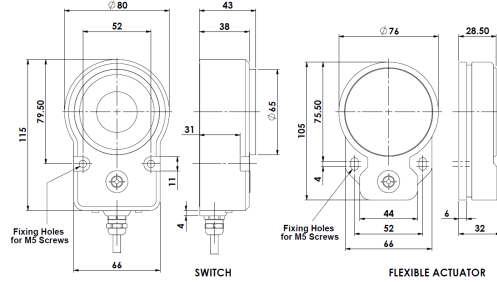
ZCode-MZ, Dimensions of all Strong Holding Force Variants
